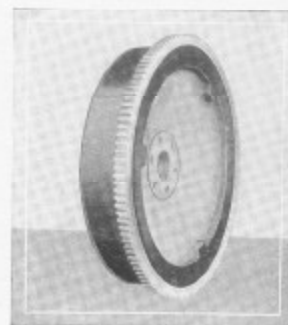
The Finished Job—The Flywheel after being Machined to Finished Size in the Lathe and Fitted with the Steel Ring Starter Gear
